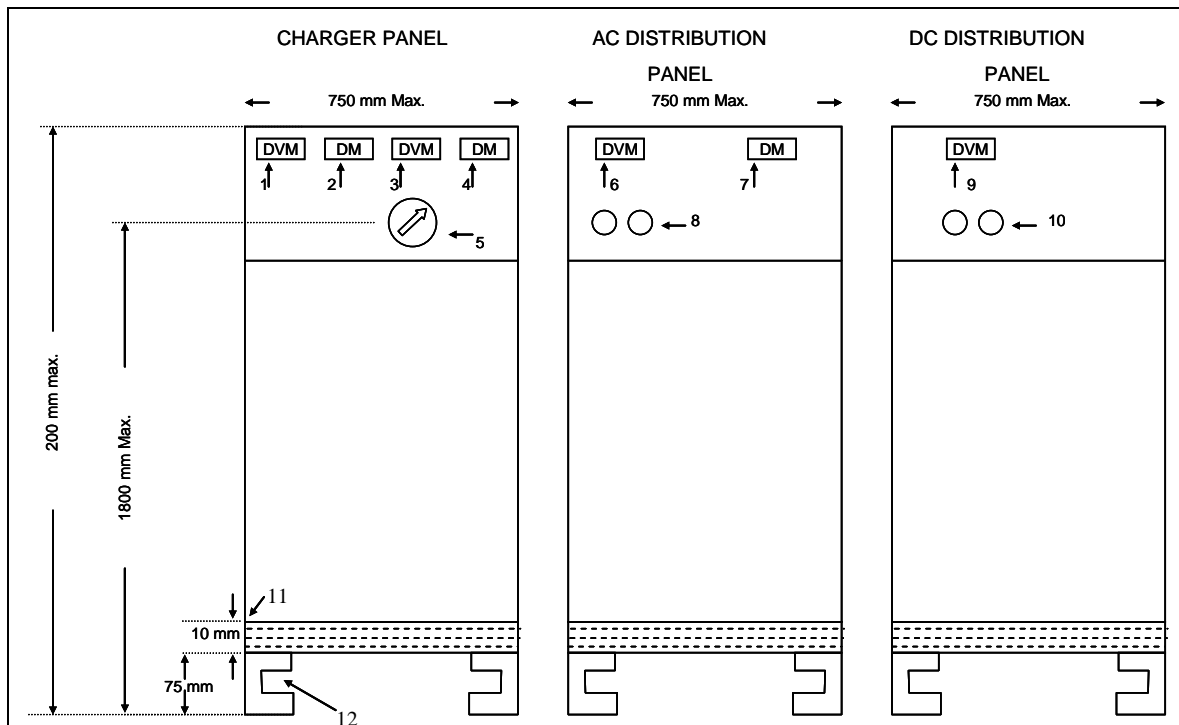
Layout of IPS cabinets (Ref. RDSO drawing No SDO/IPS/PI/Layout/007)
